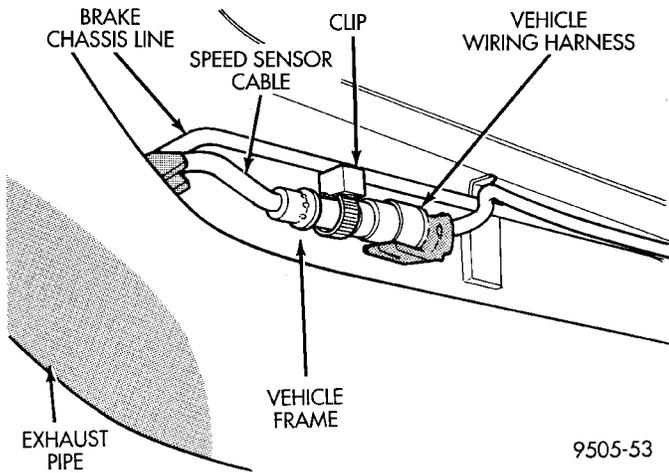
Rear Speed Sensor Connection To Vehicle Wiring Harness
